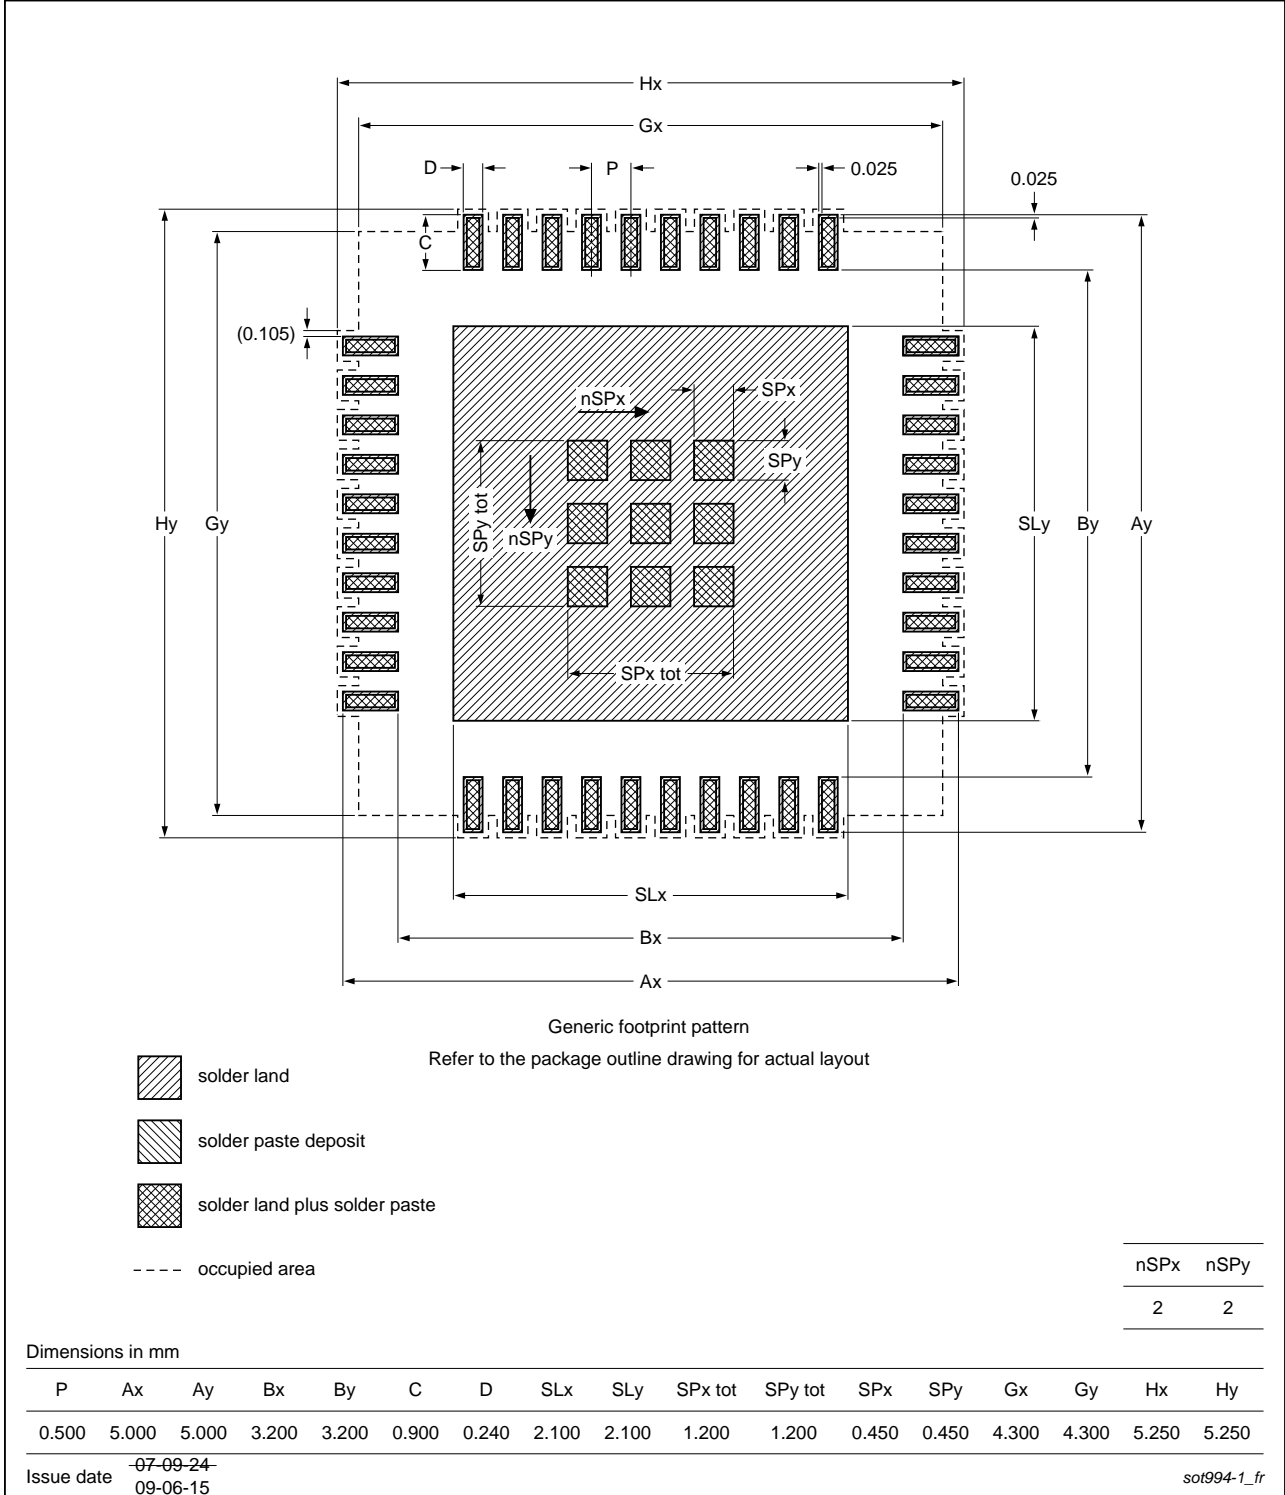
PCB footprint for SOT994-1 (HWQFN24); reflow soldering
